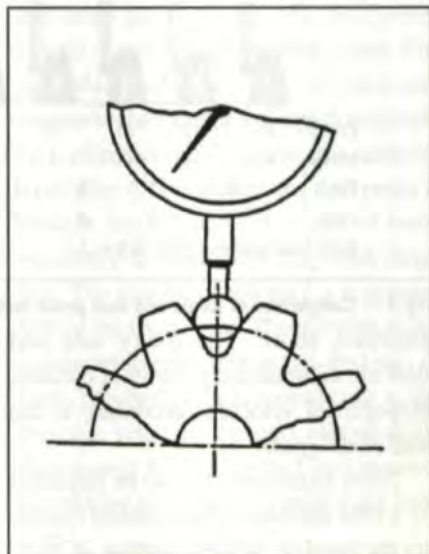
Pitchline Runout. Courtesy of AGMA.
